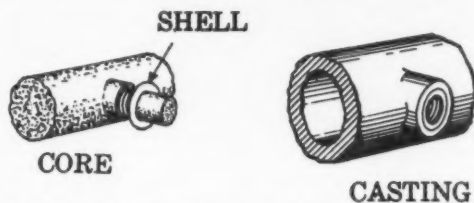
Shell Tin Filled on Core to Produce Threads in Pipe Casting.
